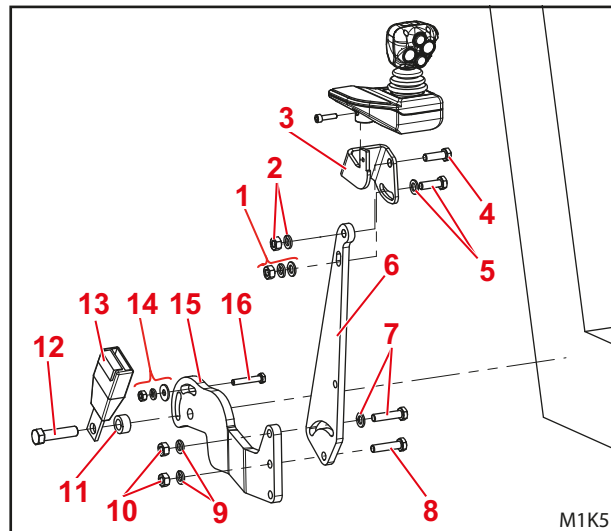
Installing the joystick and mounting for the seat belt buckle
